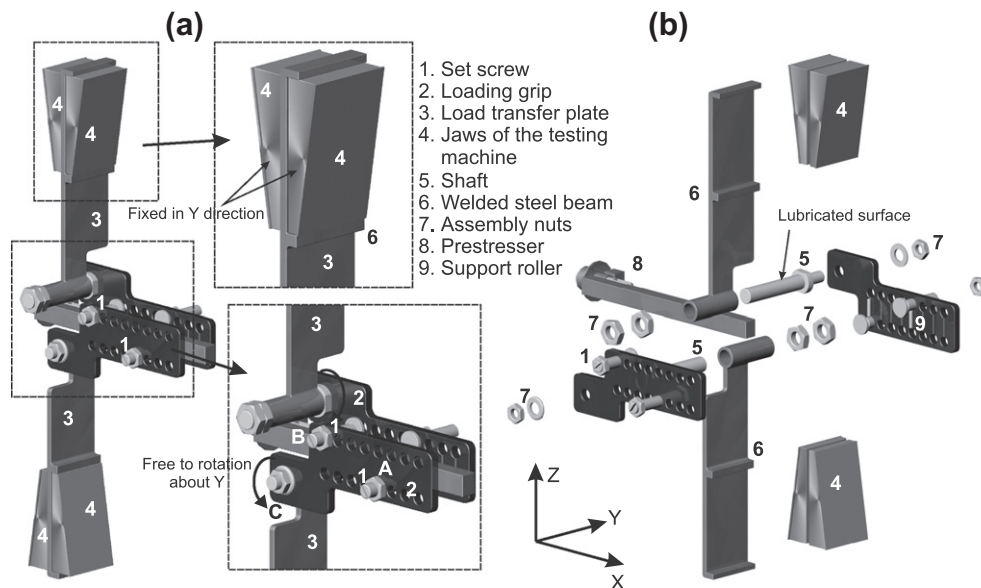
The 3D views of the PSCB_{II/III} specimen, assembled state (a), exploded view (b).
